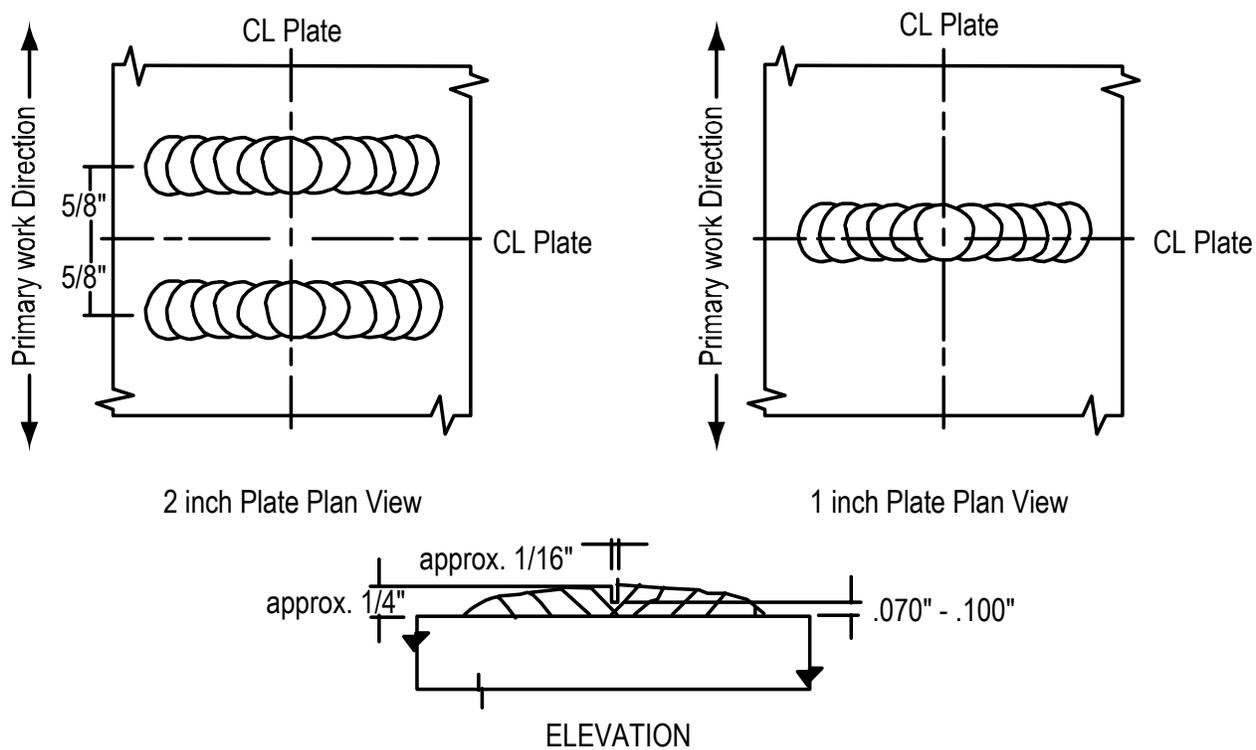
Crack starter bead configuration - base metal evaluation without a weld joint
